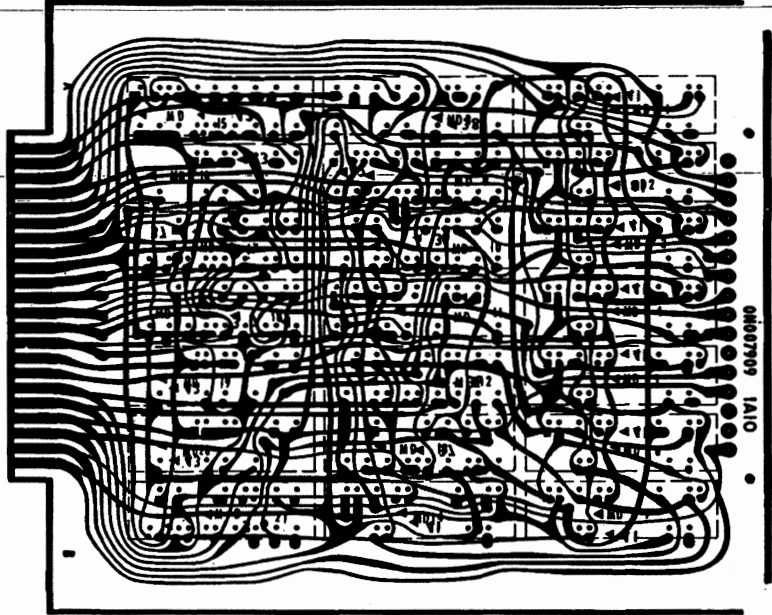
Card E-AJR Printed-Circuit Layout.
